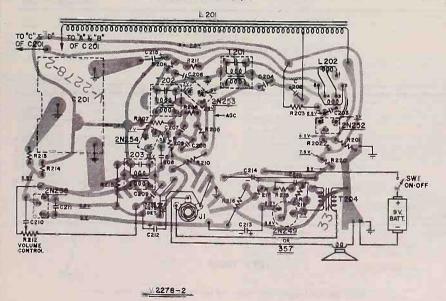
Bottom View of Printed Board Showing Top Components Symbolically
